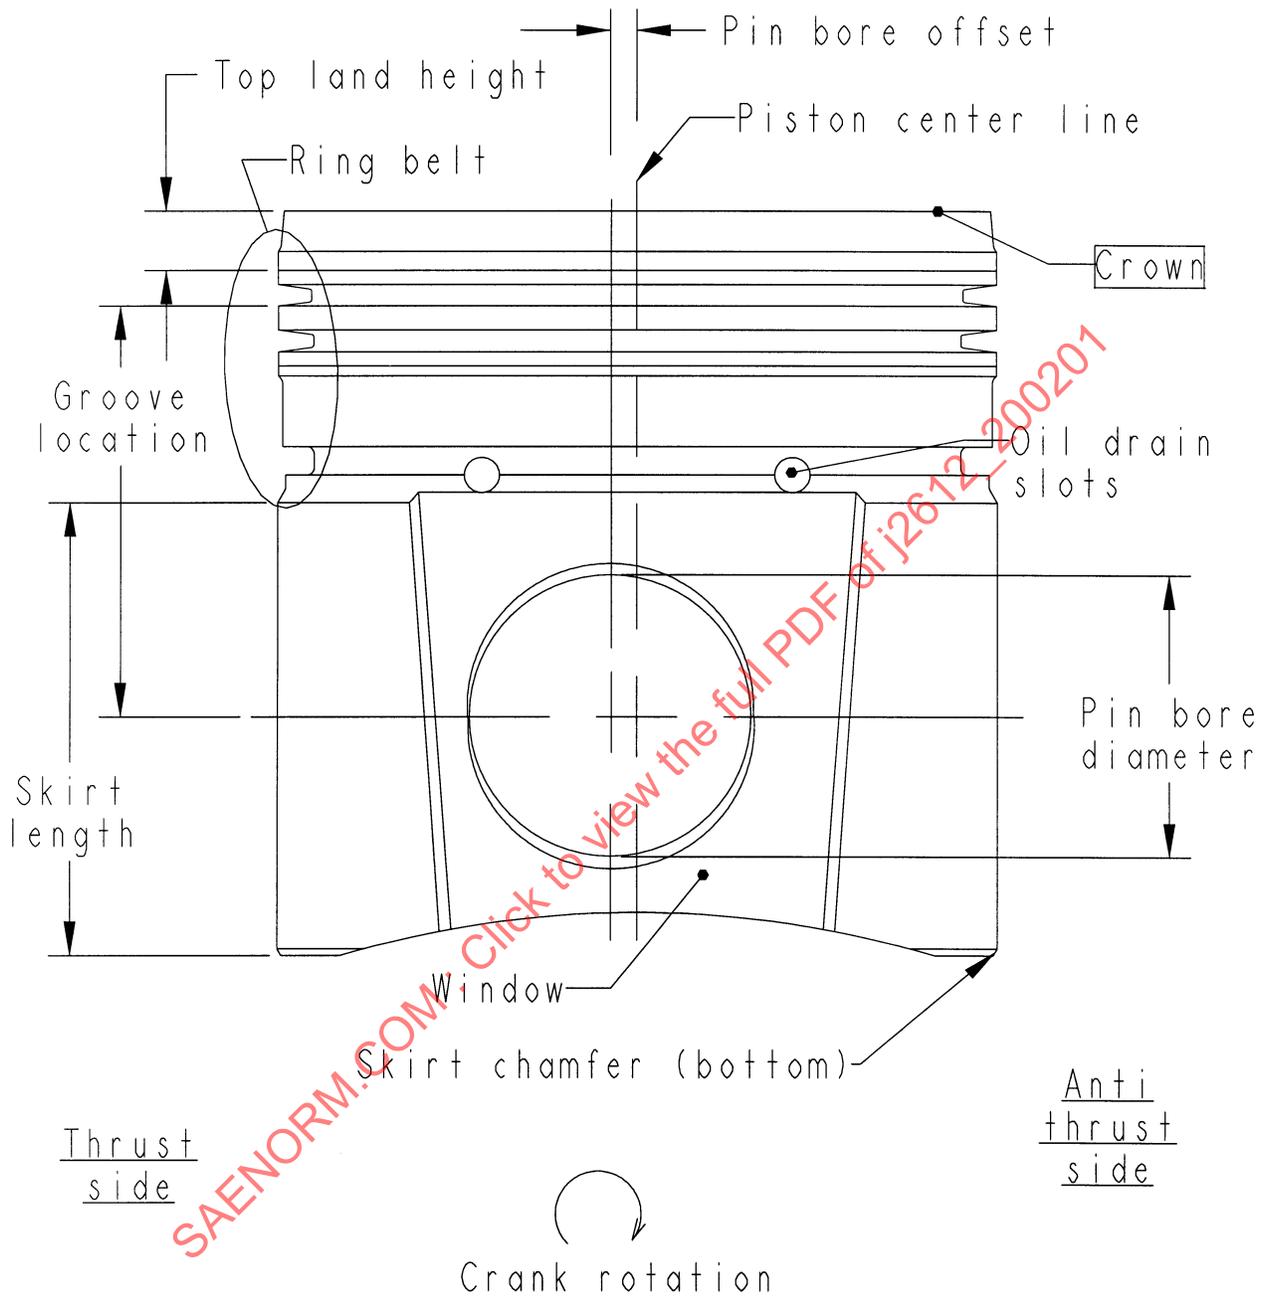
MEDIUM/HEAVY DUTY MONOBLOCK PISTON: VIEW ALONG PIN AXIS
